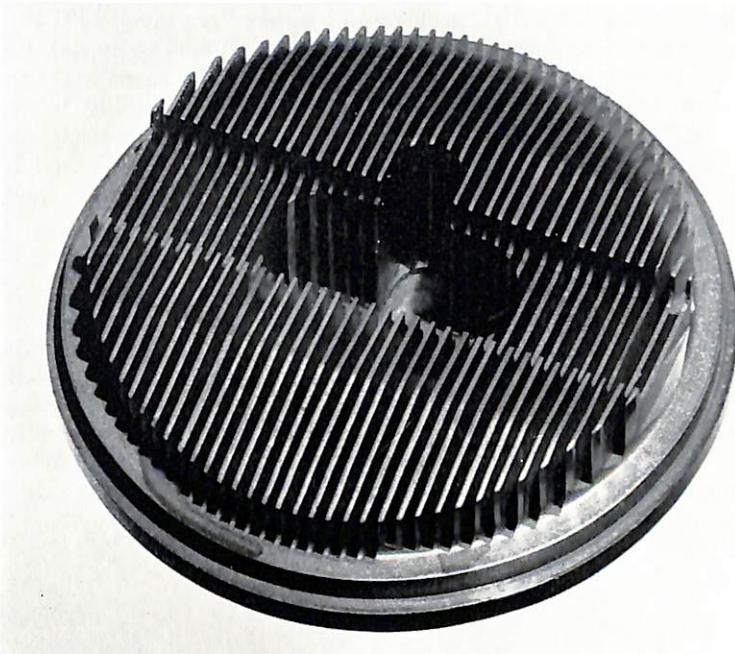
Cylinder head of aircraft engine, machined from a heat-treated chromium copper forging.
